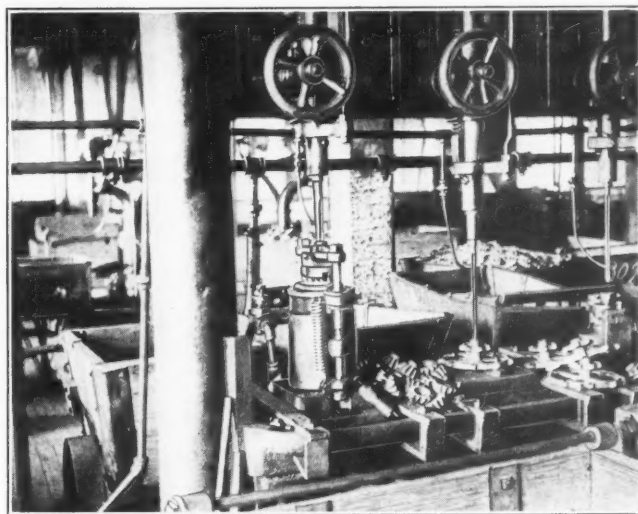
Clamping Jig in Use, with Pinion Centering Device.
